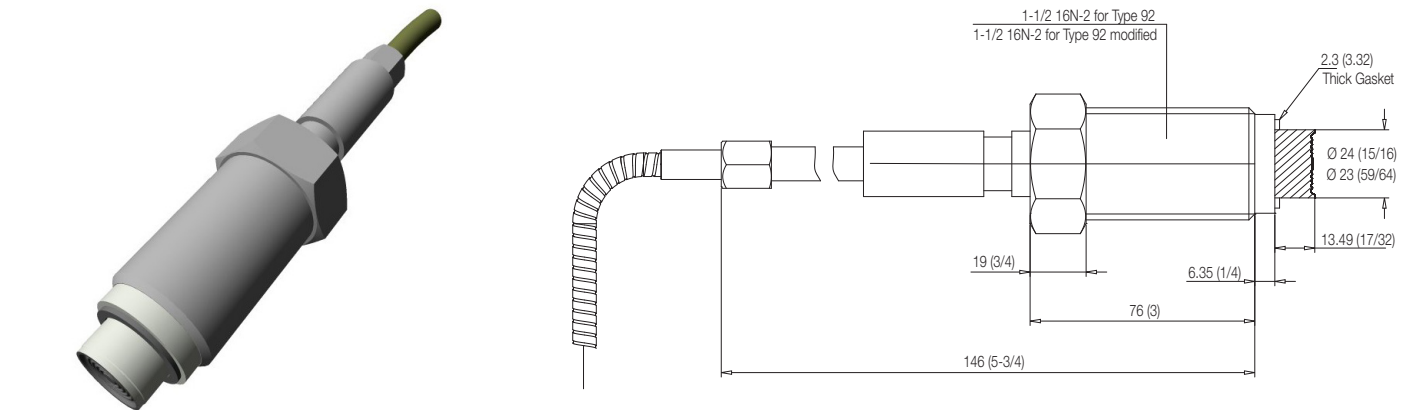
1-1/2 in. threaded union type 92 or 92 modified
